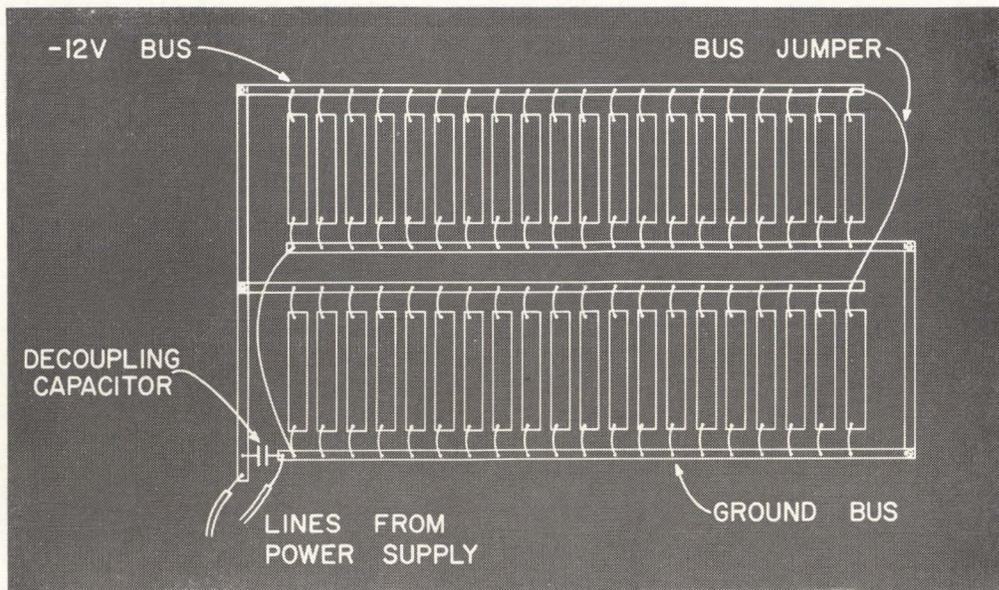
Backplane ground busses should provide means for parallel wiring to the connectors and should converge toward a central point.
